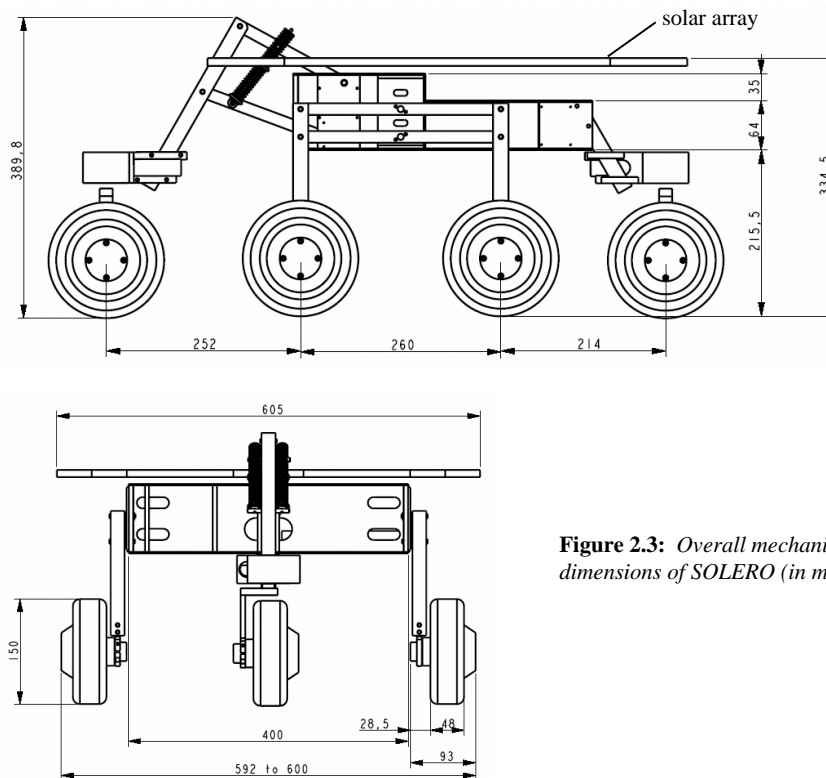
Overall mechanical dimensions of SOLERO (in mm)
